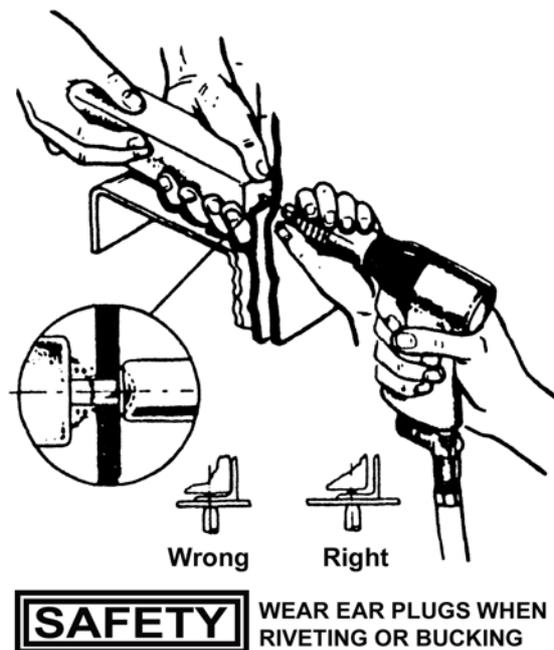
, Holding rivet gun and bucking bar on rivet.
